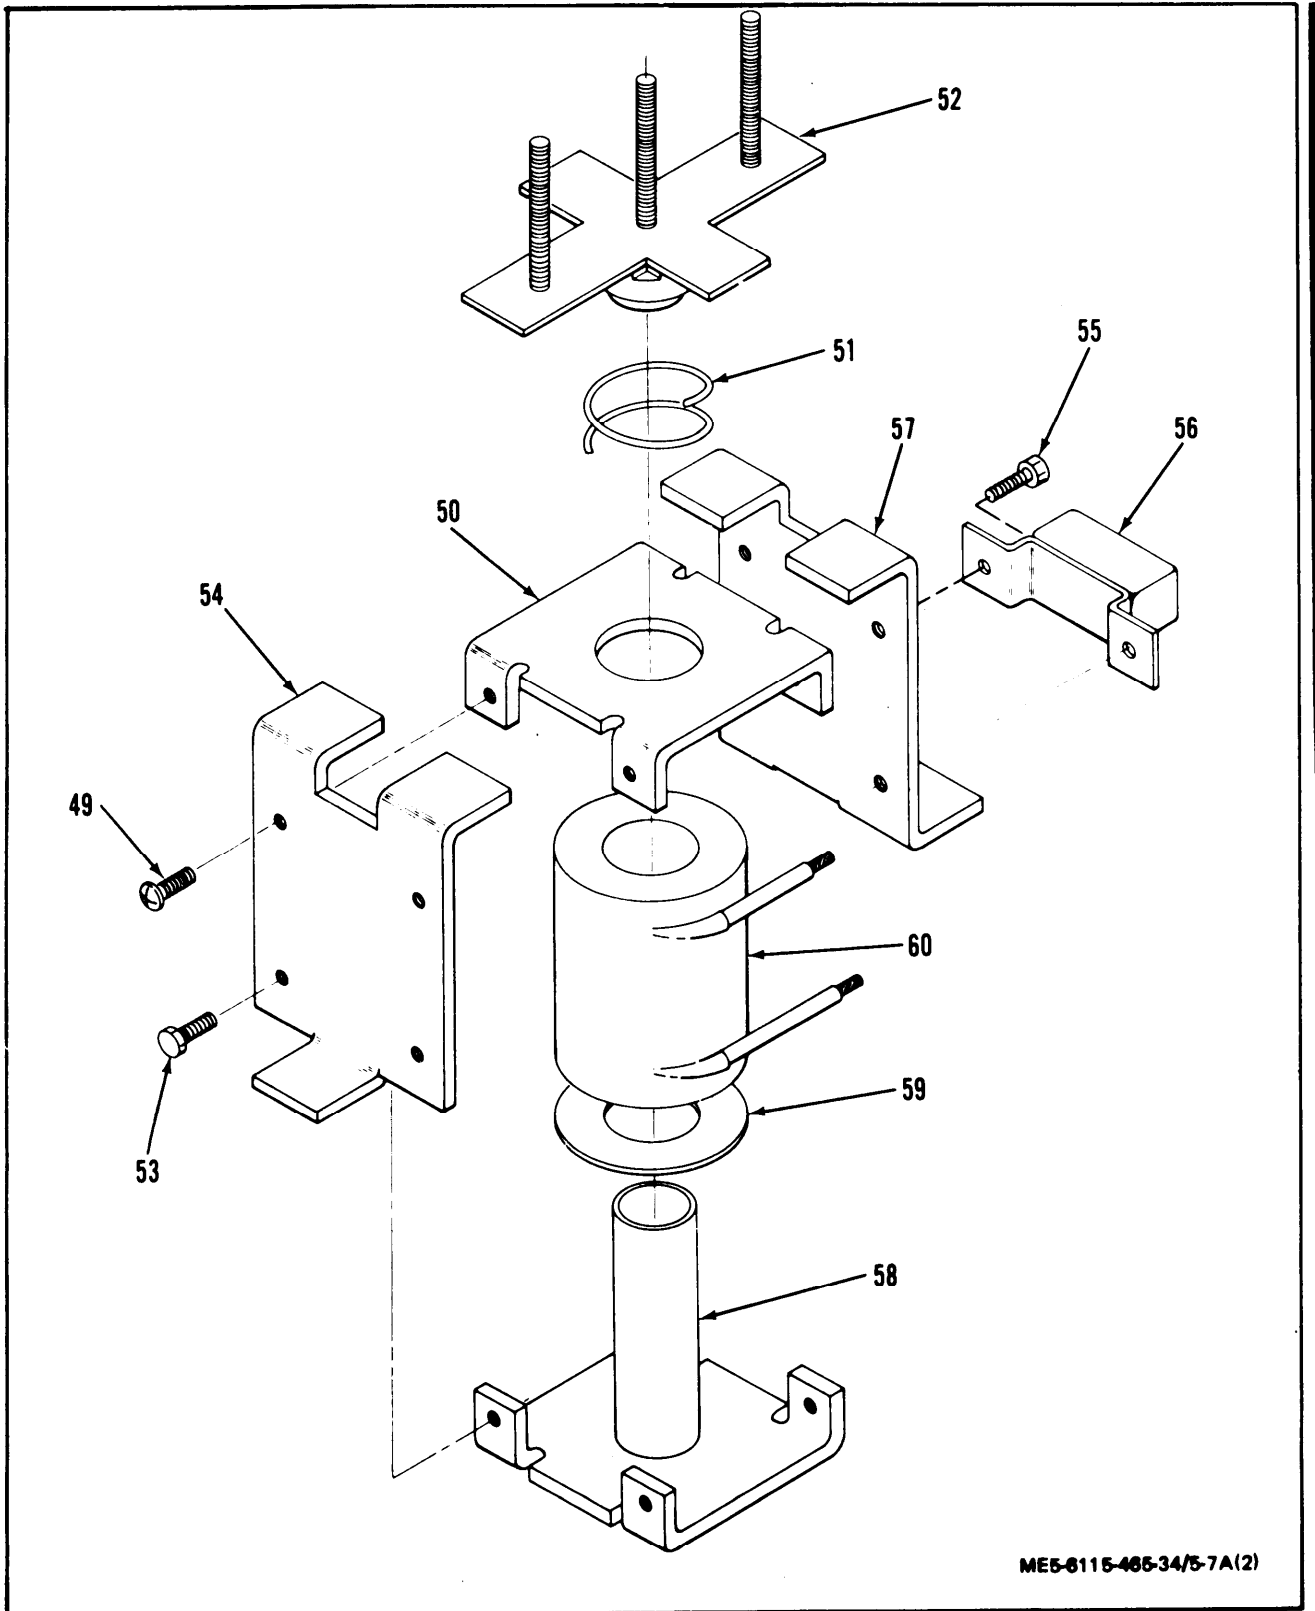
Main Load Contactor, Exploded View (Effective with Serial No. RZ70001 and KZ00001 thru KZ02752) (Sheet 2 of 3)
